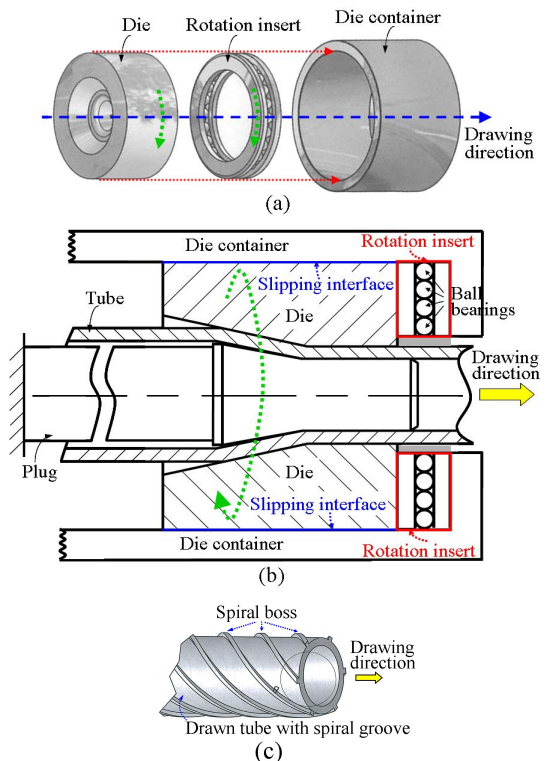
Schematic of drawing die with rotation insert: (a) complete view of drawing dies, (b) plane-view of the die assembly, and (c) shape of drawn tube with spiral grooves.
